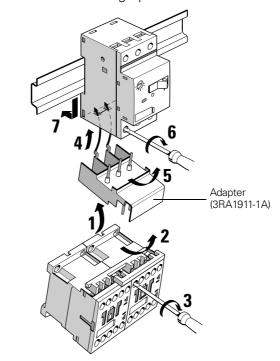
Self-assembly of a fuseless load feeder (frame size S00)
